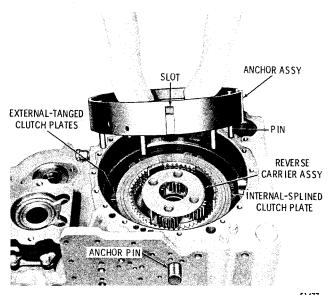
Installing forward and reverse clutch anchor assembly (-3 model)
